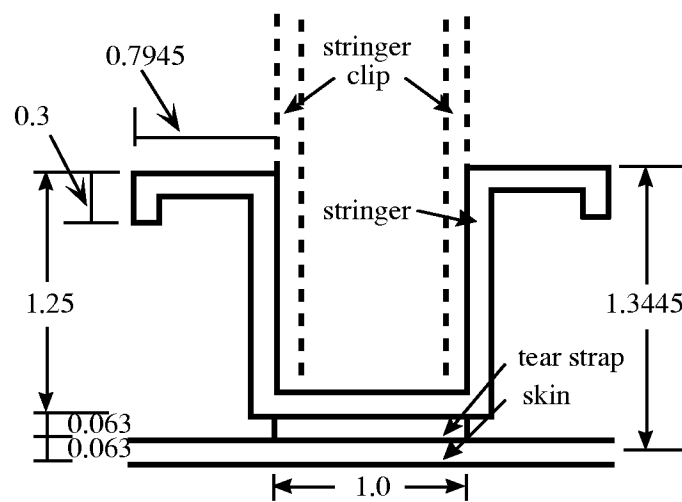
Validation example: dimensions of stringer (dimensions in inches).
